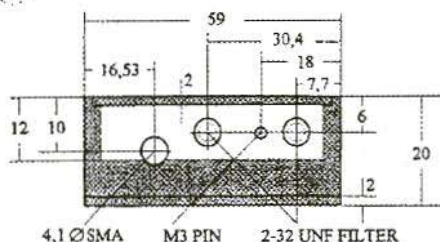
Dimensions of the Telemeter ZG4-2-N Housing in mm
